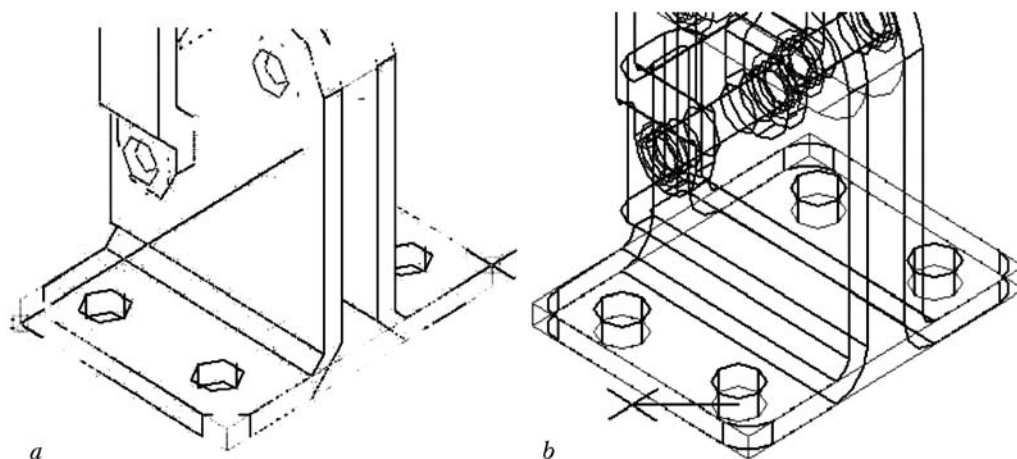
Picking up principal bases of fixture units: *a* – plane base; *b* – mounting hole
